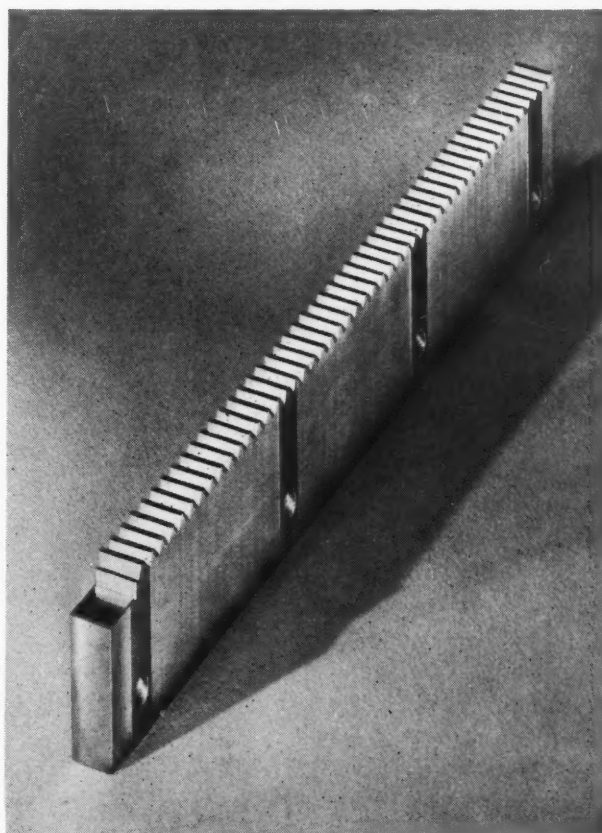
Master worm section of the Kodak "Conju-Gage," which may be used for checking all gears of the same normal pitch and pressure angle
